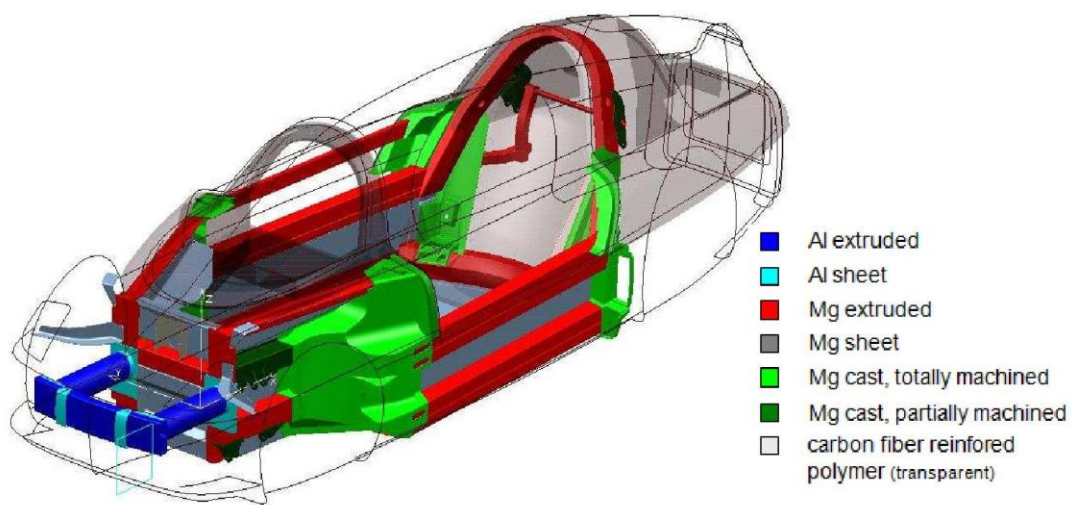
The VW 1-liter Space Frame utilizing extensive use of magnesium ⁽⁸⁾
